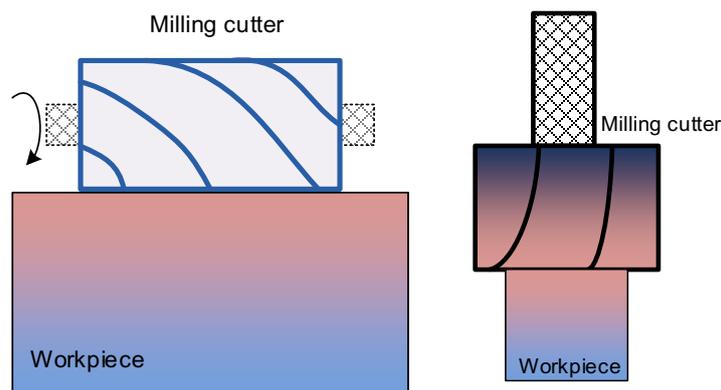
Schematic diagram showing milling cutter and workpiece interaction during a) peripheral milling and b) face milling.
